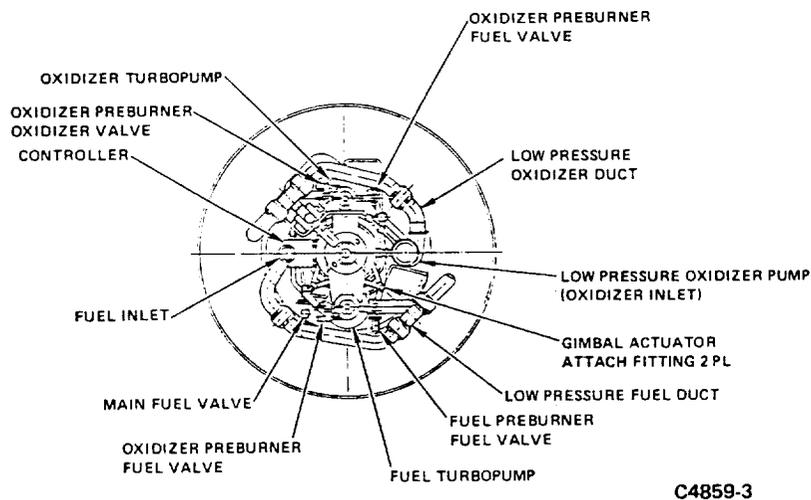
Dual Fuel-Rich Preburner Engine Layout, Top View
